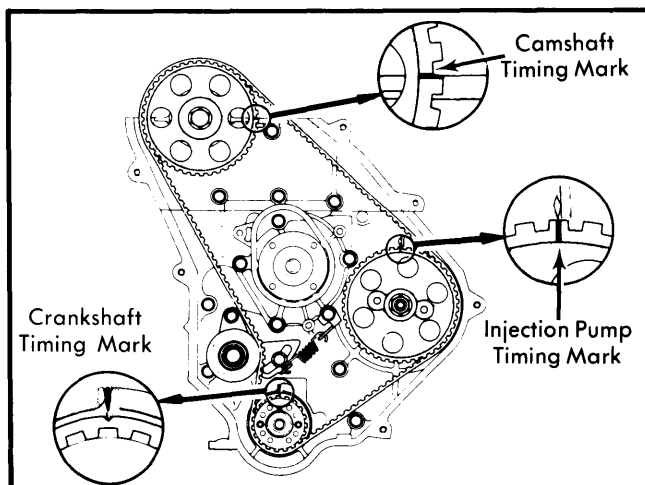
Timing Mark Alignment After Turning Crankshaft 2 Revolutions
